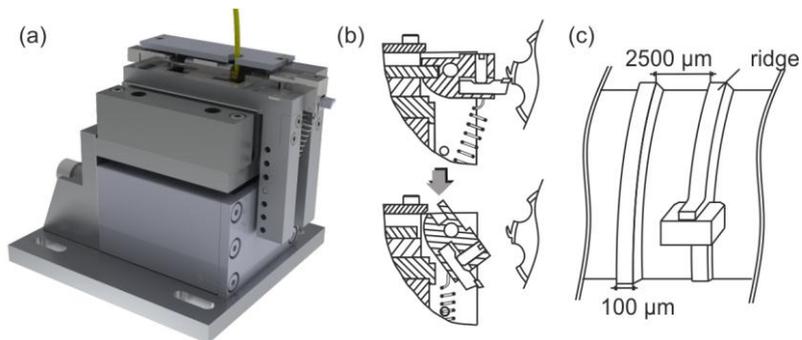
(a) Perspective view of the assembly (b) Details of the release mechanism (c) Process conditions in orthogonal cutting.
